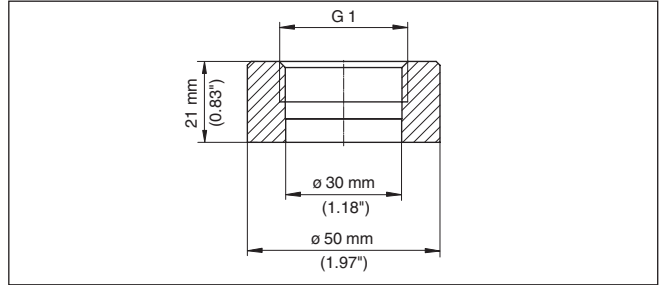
Dimensions of welded socket, G1 (ISO 228-1) - VEGABAR 82, 83
